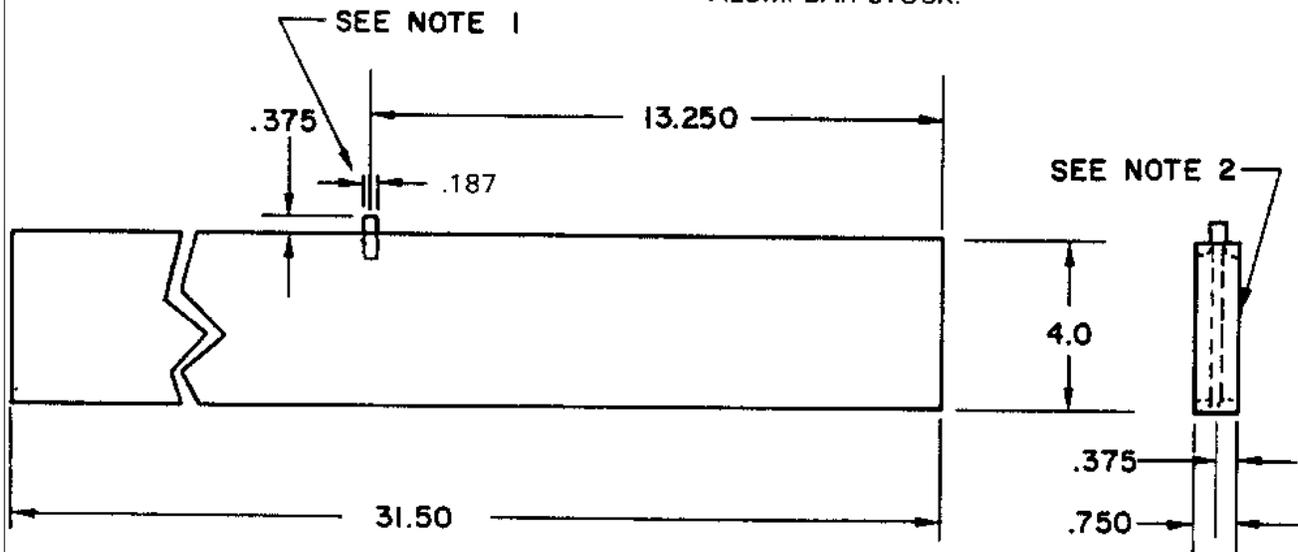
Fabricated Aileron and Flap Rigging Tool
